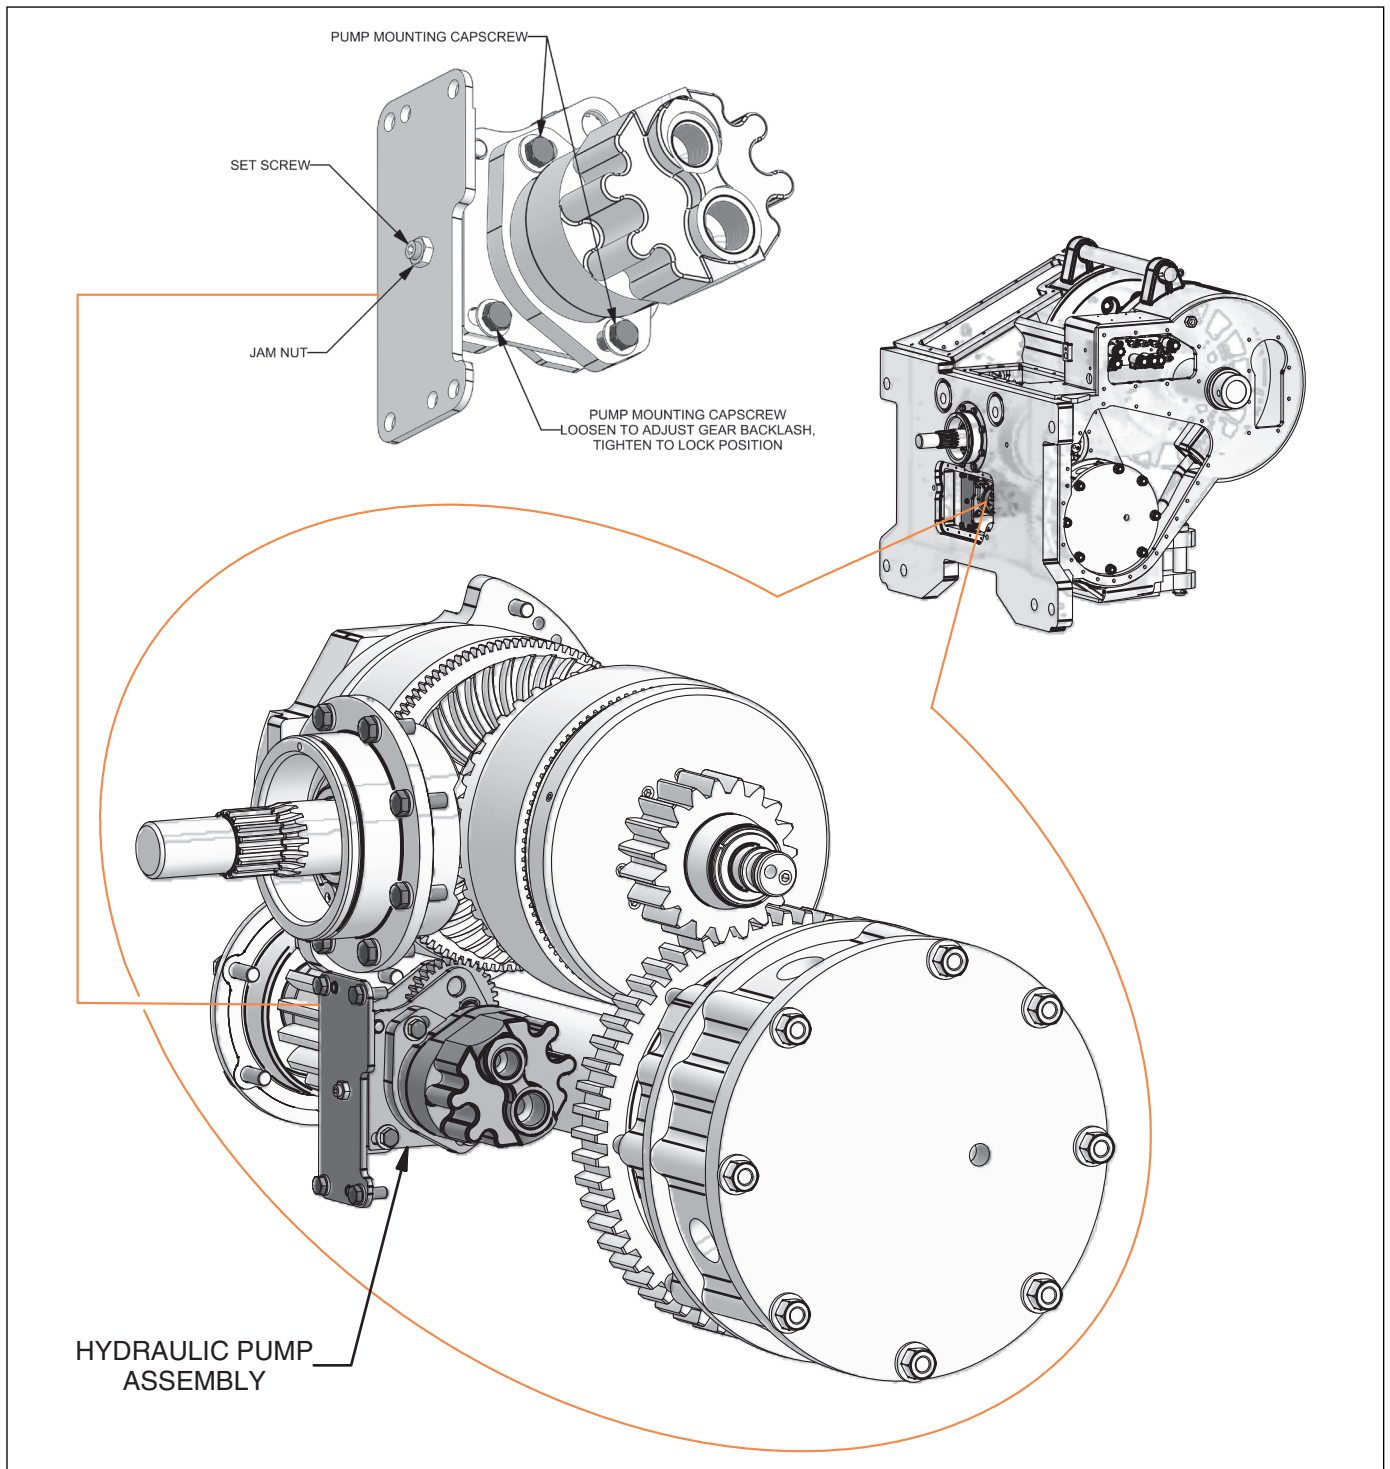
Location of Hydraulic Pump - Ratio #7
